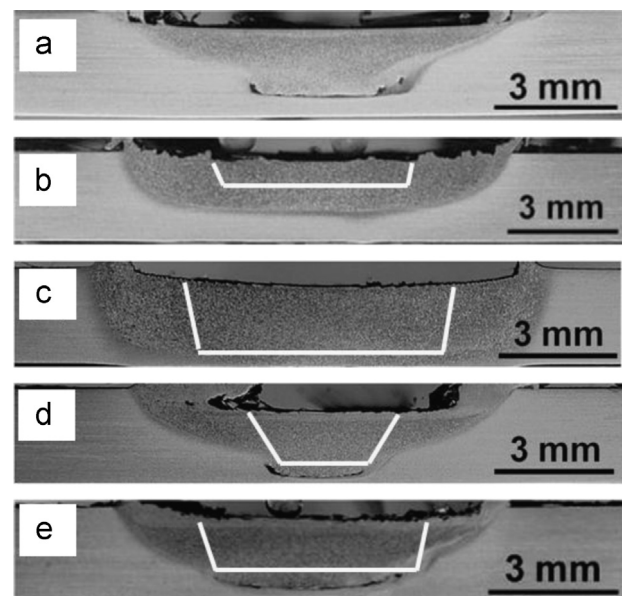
Optical microscope images of weld cross-sections after FSW with tool rotation rate of 1000 rpm and traverse speed of 50 mm per minute using (a) CY16, (b) W-La, (c) W-La-L, (d) WC411 and (e) WC411-L tools.
